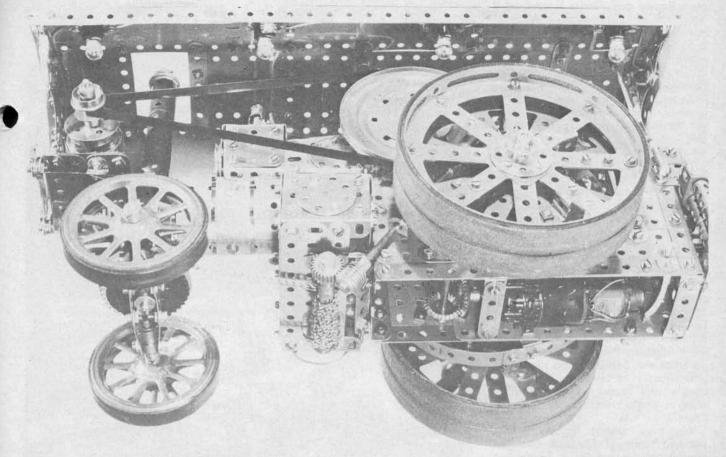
Sprocket Chain used as steering chain on a simple model showmans engine. Winding barrel is studded with Grub screws to provide chain grip.
